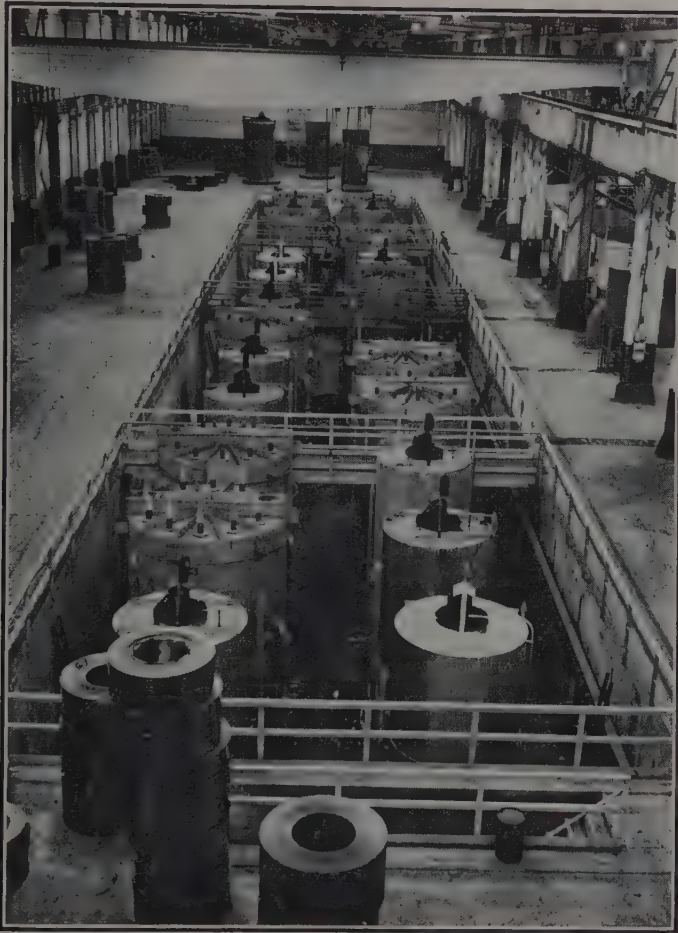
Group of batch-type furnaces for the annealing of coils. Courtesy of Lee Wilson Engineering Co.
